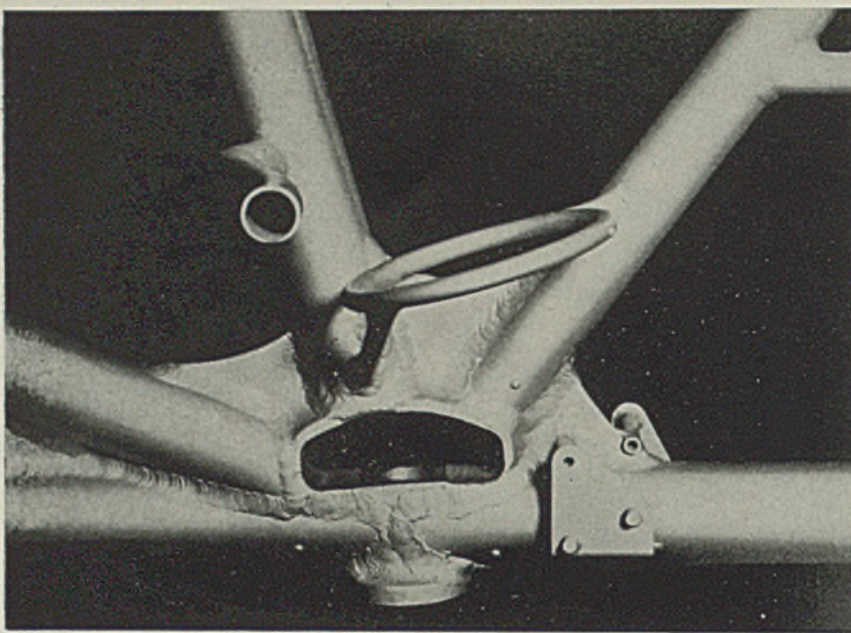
This welded joint of converging tubes joined to a special control fitting is strong, yet it adds a minimum amount of weight to the structure
